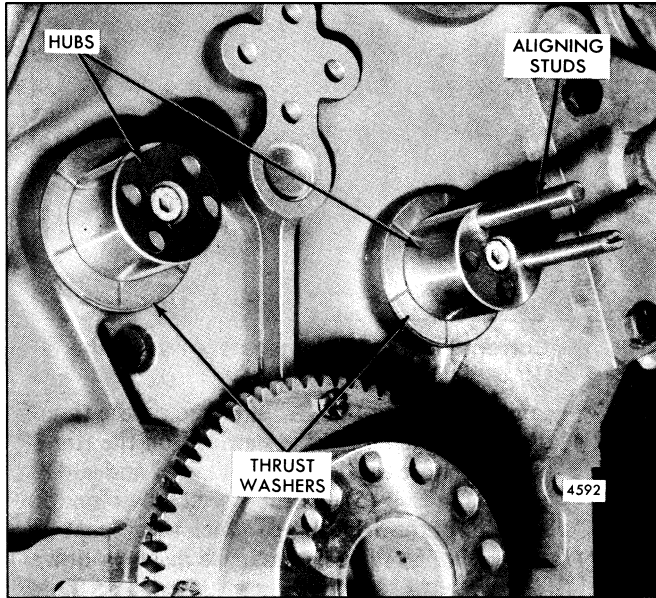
Aligning Front Gear Train Idler Gear Hubs
